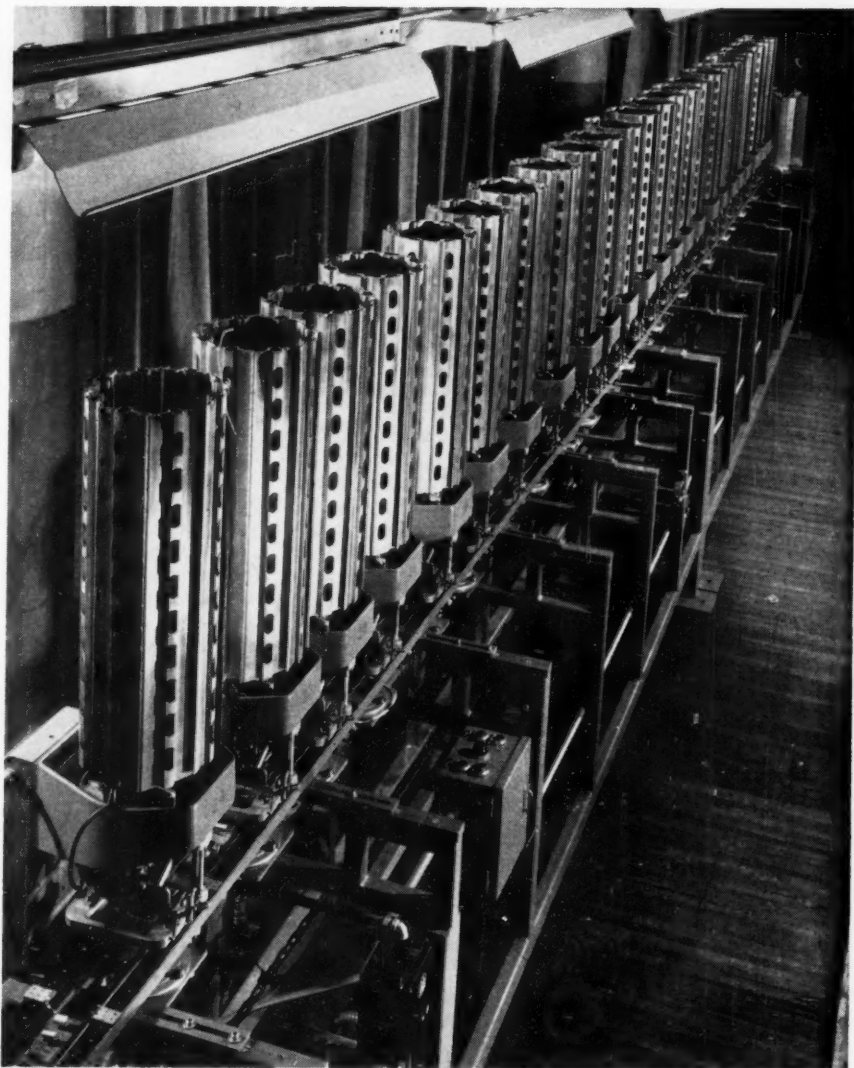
This is Autofab, the automatic electronic assembly machine developed and manufactured by the Mechanical Division of General Mills, Inc., Minneapolis, Minn. It inserts from 1 to 24 electronic components—assorted resistors, capacitors, pulse transformers, and diodes—into printed-circuit plates. Normal speed is 20 assemblies a minute, which is nearly 10,000 in an 8-hr day. The first Autofab machine is working for defense at International Business Machines Corporation to speed production of huge air-defense computers, but others are soon expected to be in use by radio and television manufacturers.
